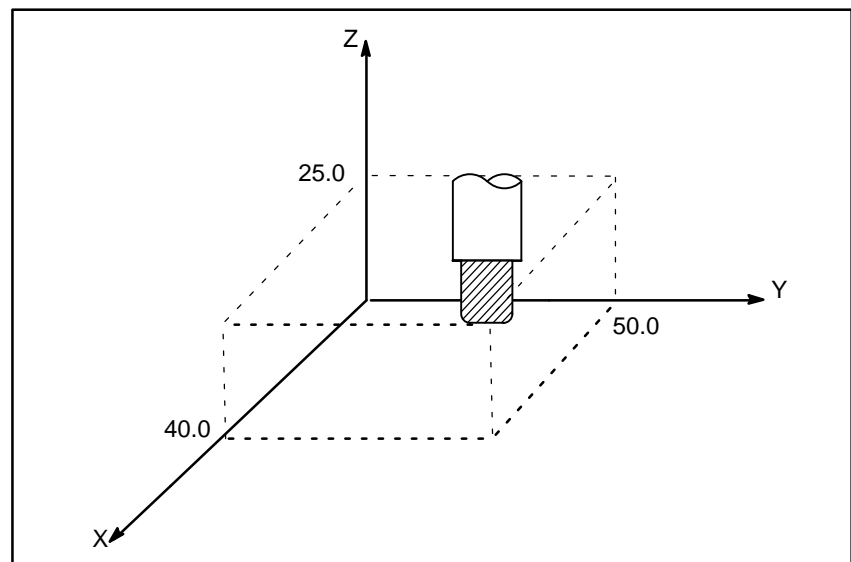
Tool position specified by X40.0Y50.0Z25.0
